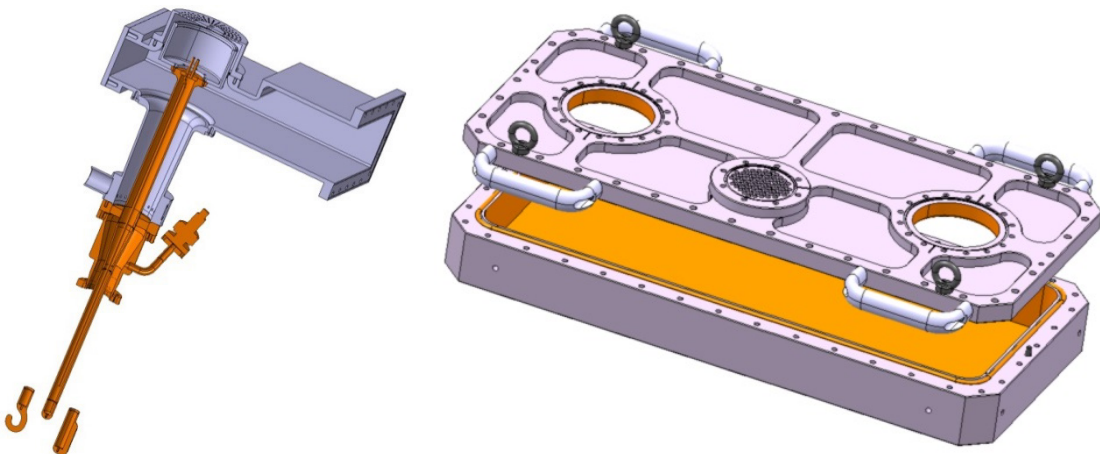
(a) Input coupler assembly; (b) test box for RF conditioning
